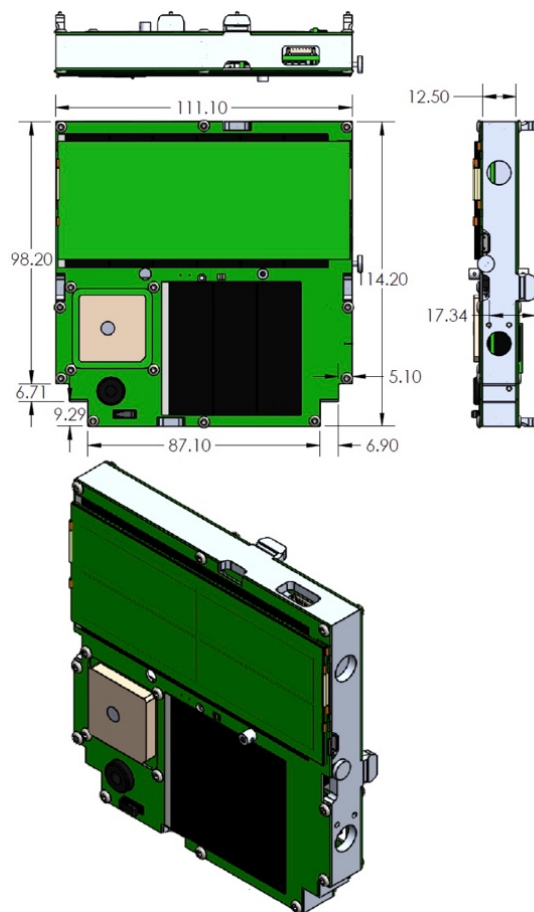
ThinSat External Dimensions. Courtesy of VaSpace (courtesy of NearSpace Launch Inc.).
